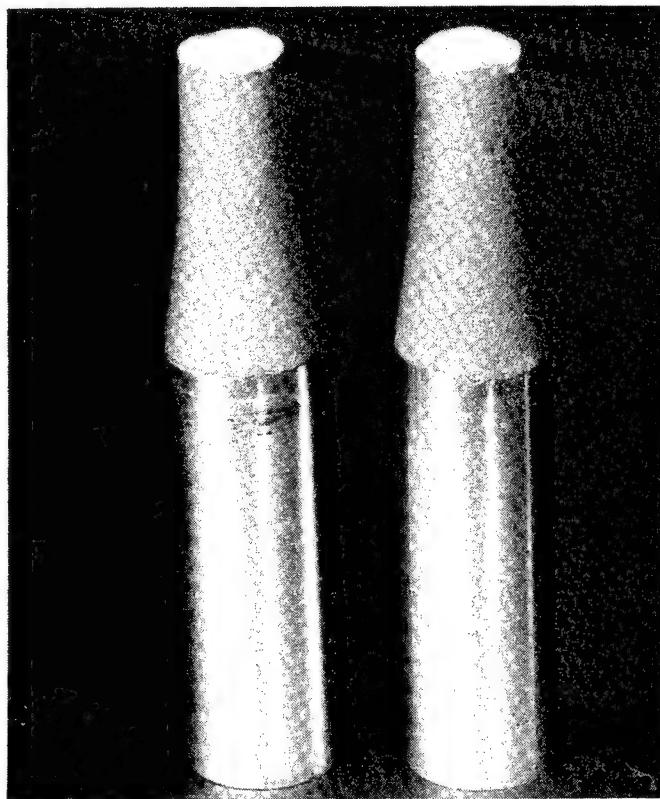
Fractured AISI-310 Stainless Steel Fatigue Specimen Coated with
